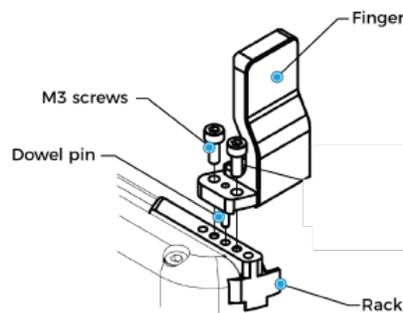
Installing the Flat Overmolded Fingertips on the racks
